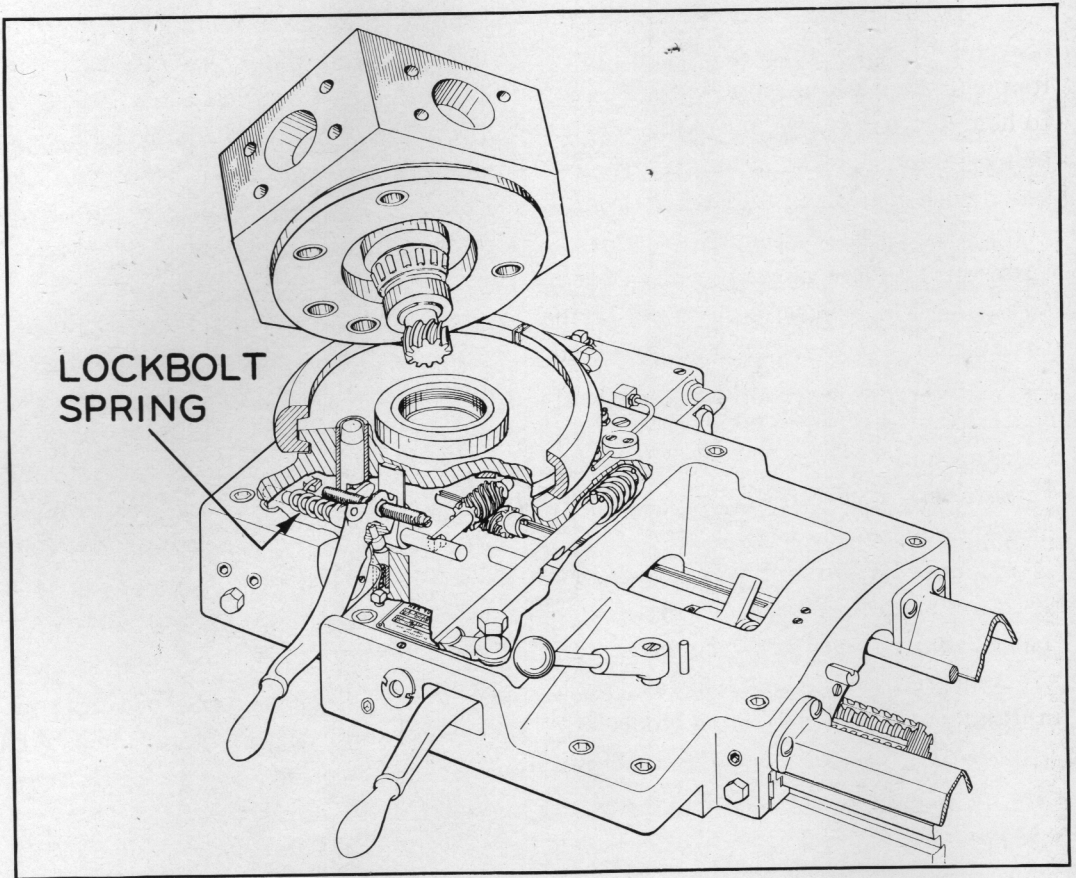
Probably no part in the turret lathe is more important than the lockbolt spring.
